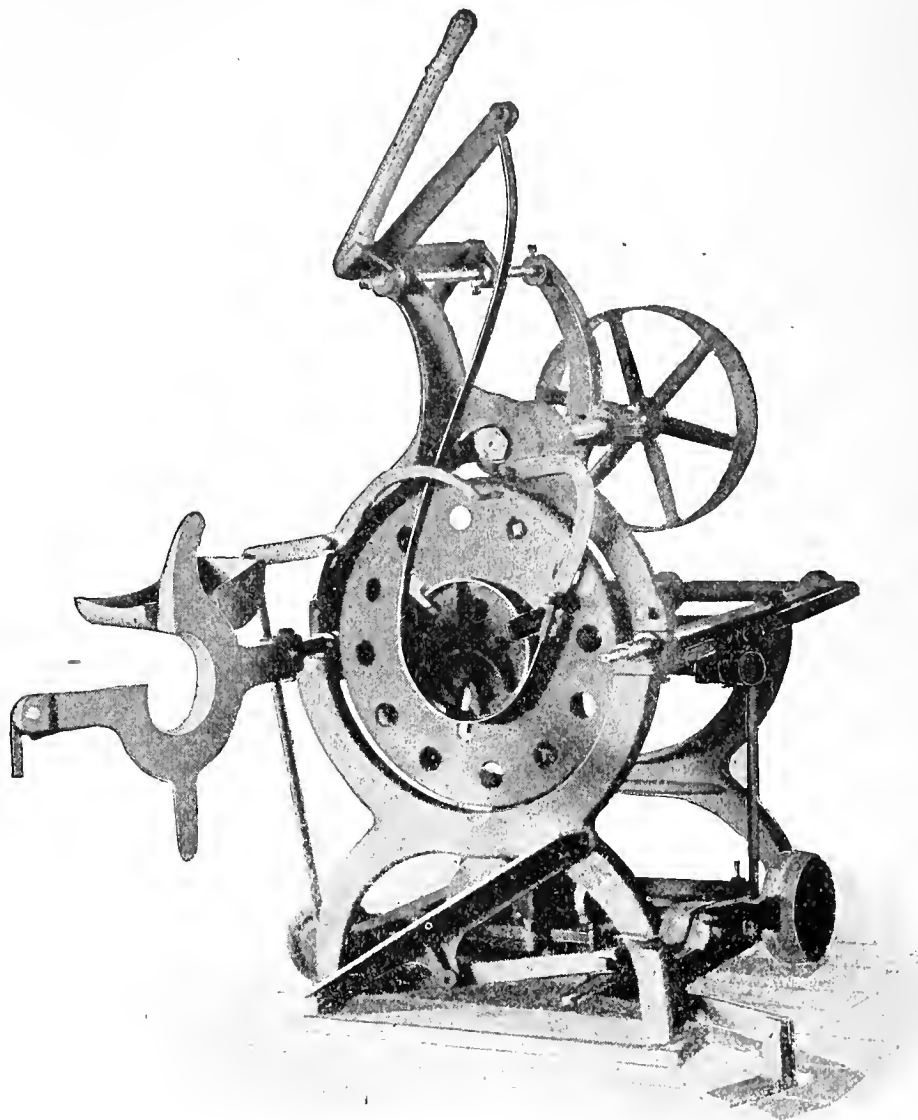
"THE WARD" HOOP-COILING MACHINE.
